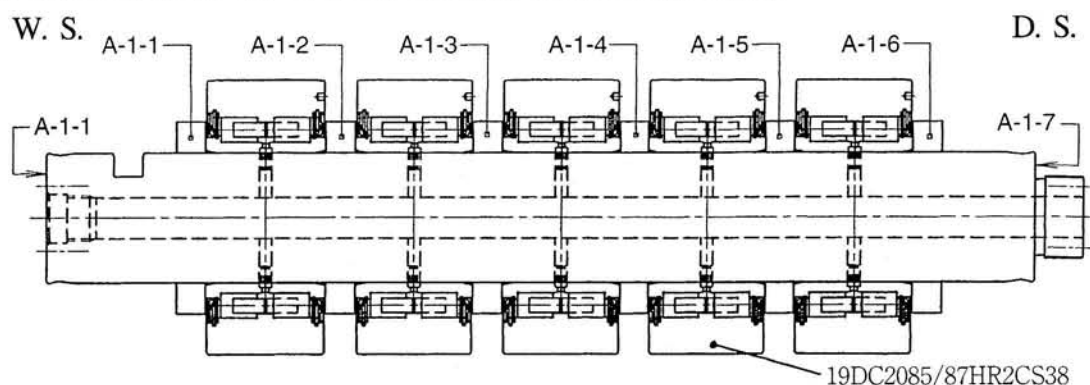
Construction of upper side large-diameter BUR assembly
